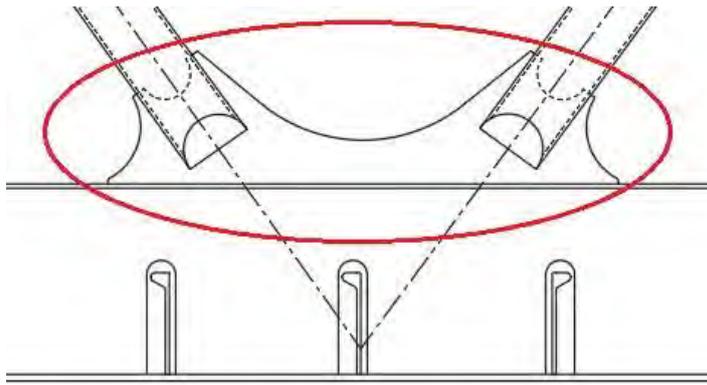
Joints between diaphragm trusses and flanges can be another case for robotic welding
